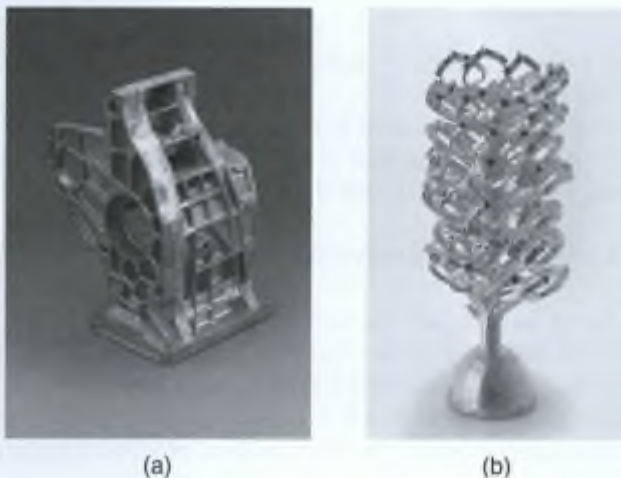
Examples of cast parts. (a) A die-cast aluminum transmission housing. (b) A tree of rings produced through investment casting. *Source:* (b) Courtesy of Romanoff, Inc.
